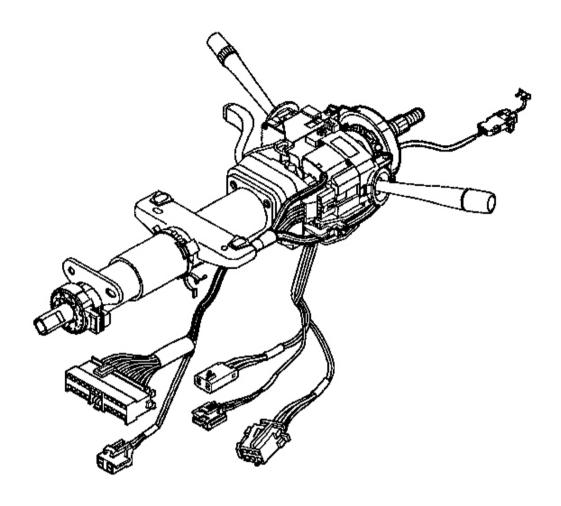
Wire Harness Assembly & Steering Column Jacket Assembly Courtesy of GENERAL MOTORS CORP.
